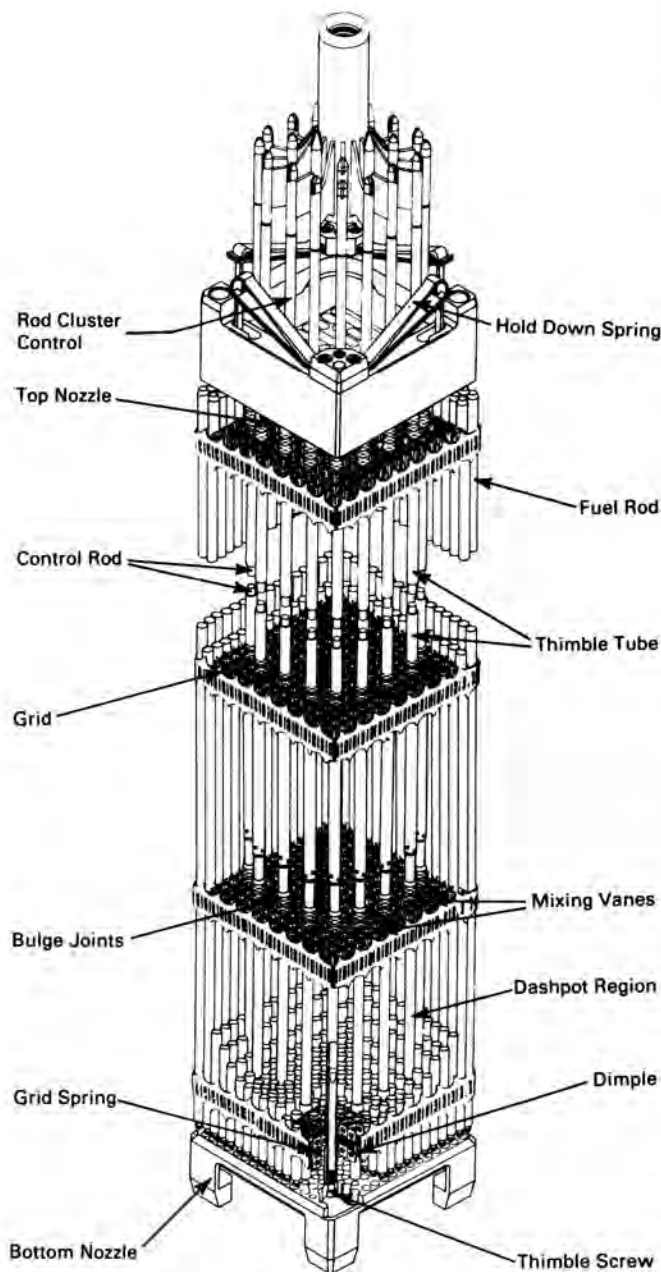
Westinghouse 17 x 17 Fuel Assembly.
